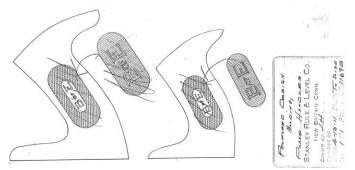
A proposed design drawing of the Board of Education Handles, dated April 4th, 1911.
